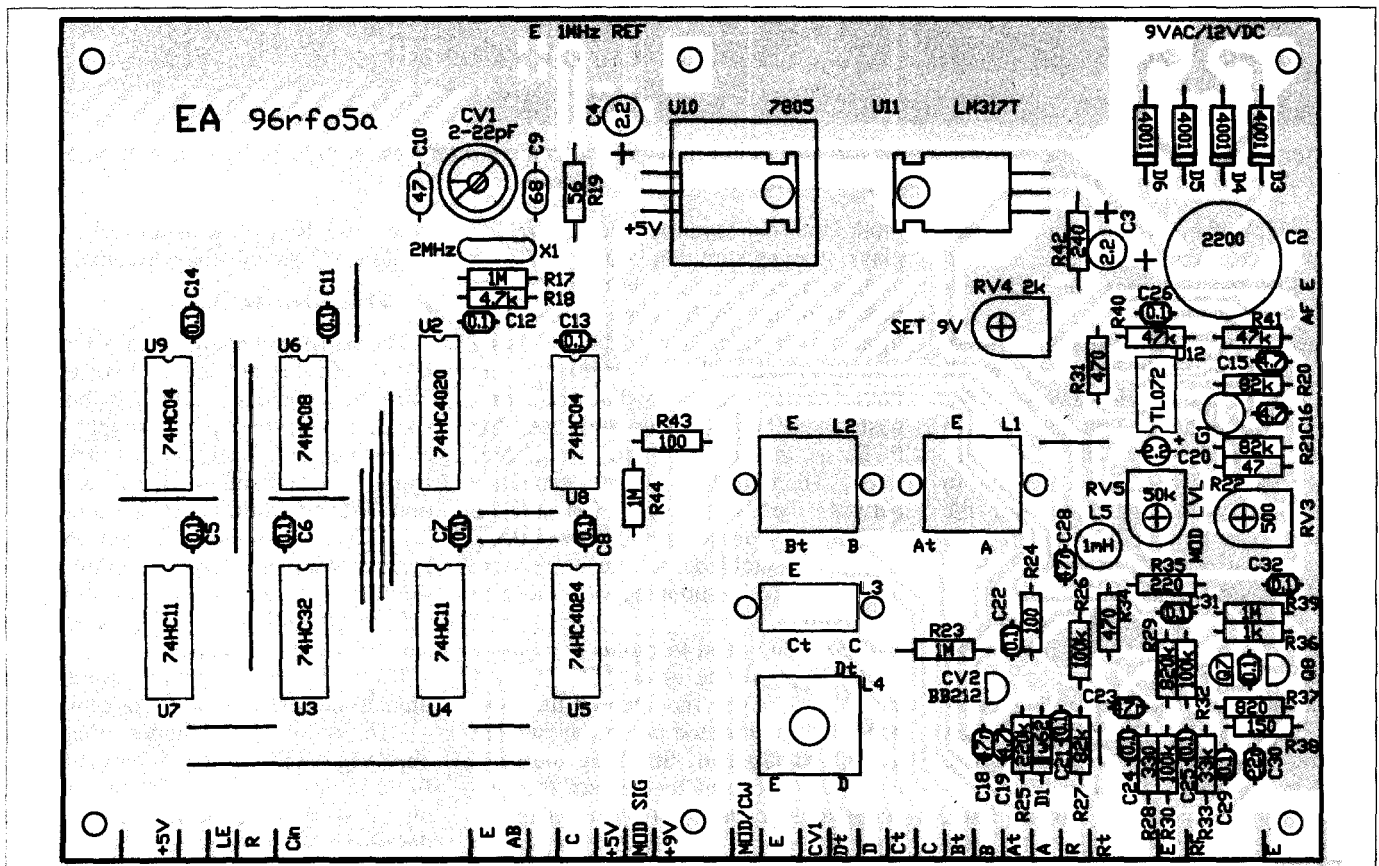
Similarly use this main board overlay diagram as a guide to parts placement on this PCB, together with the photos.
